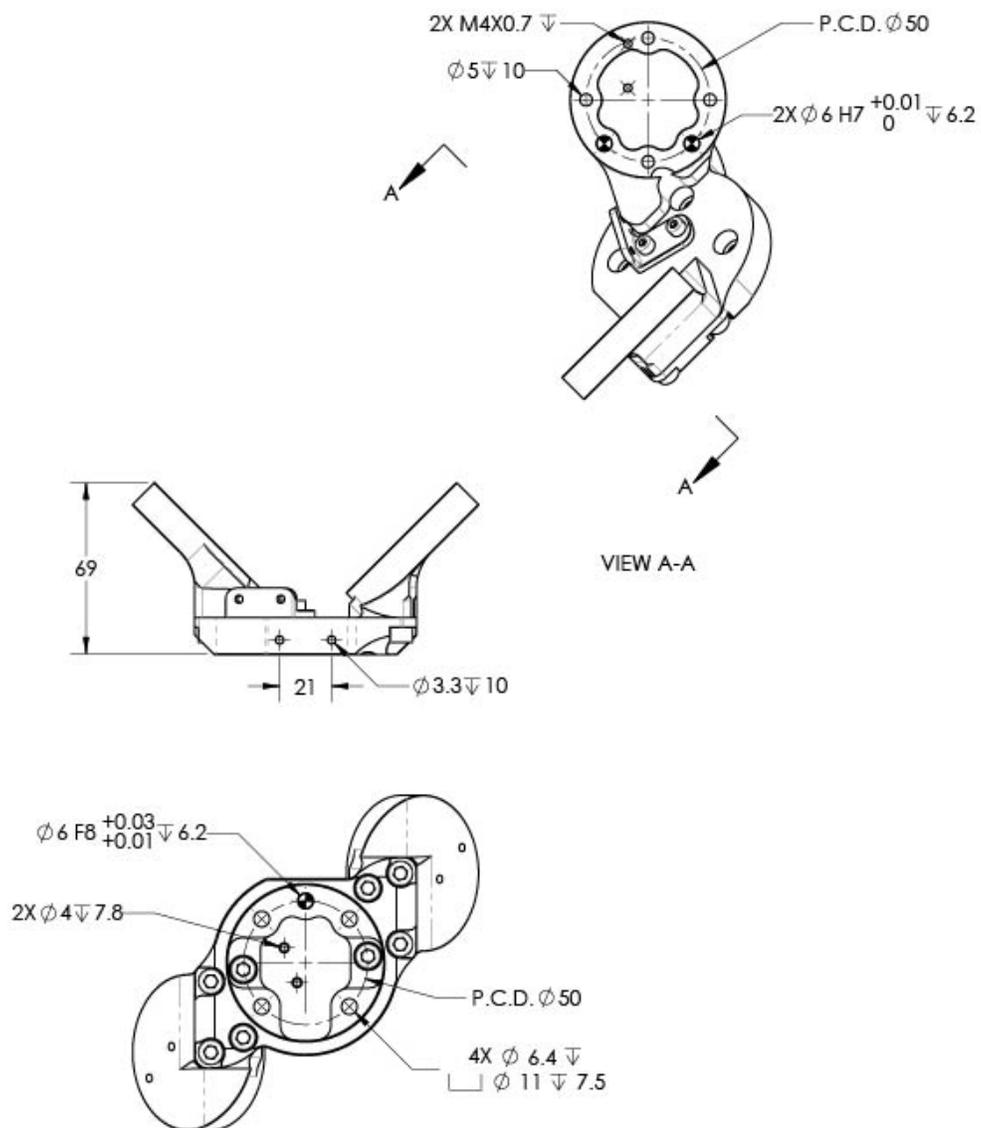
Compact Dual Hand-E Bracket technical dimensions
